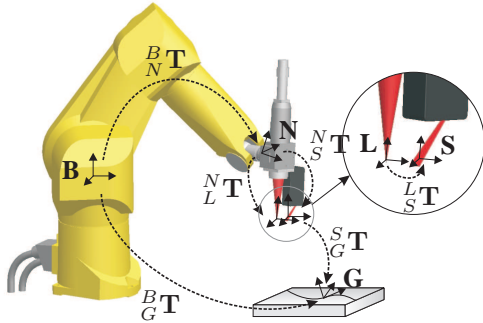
Frames in a sensor-guided robotic laser welding system
